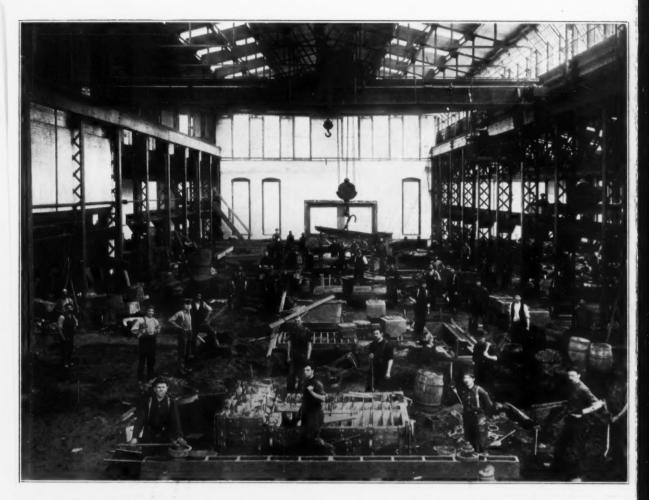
View in Main Bay of the Foundry, Looking North. Fig. 8. View in East Bay of the Foundry, Looking North.
